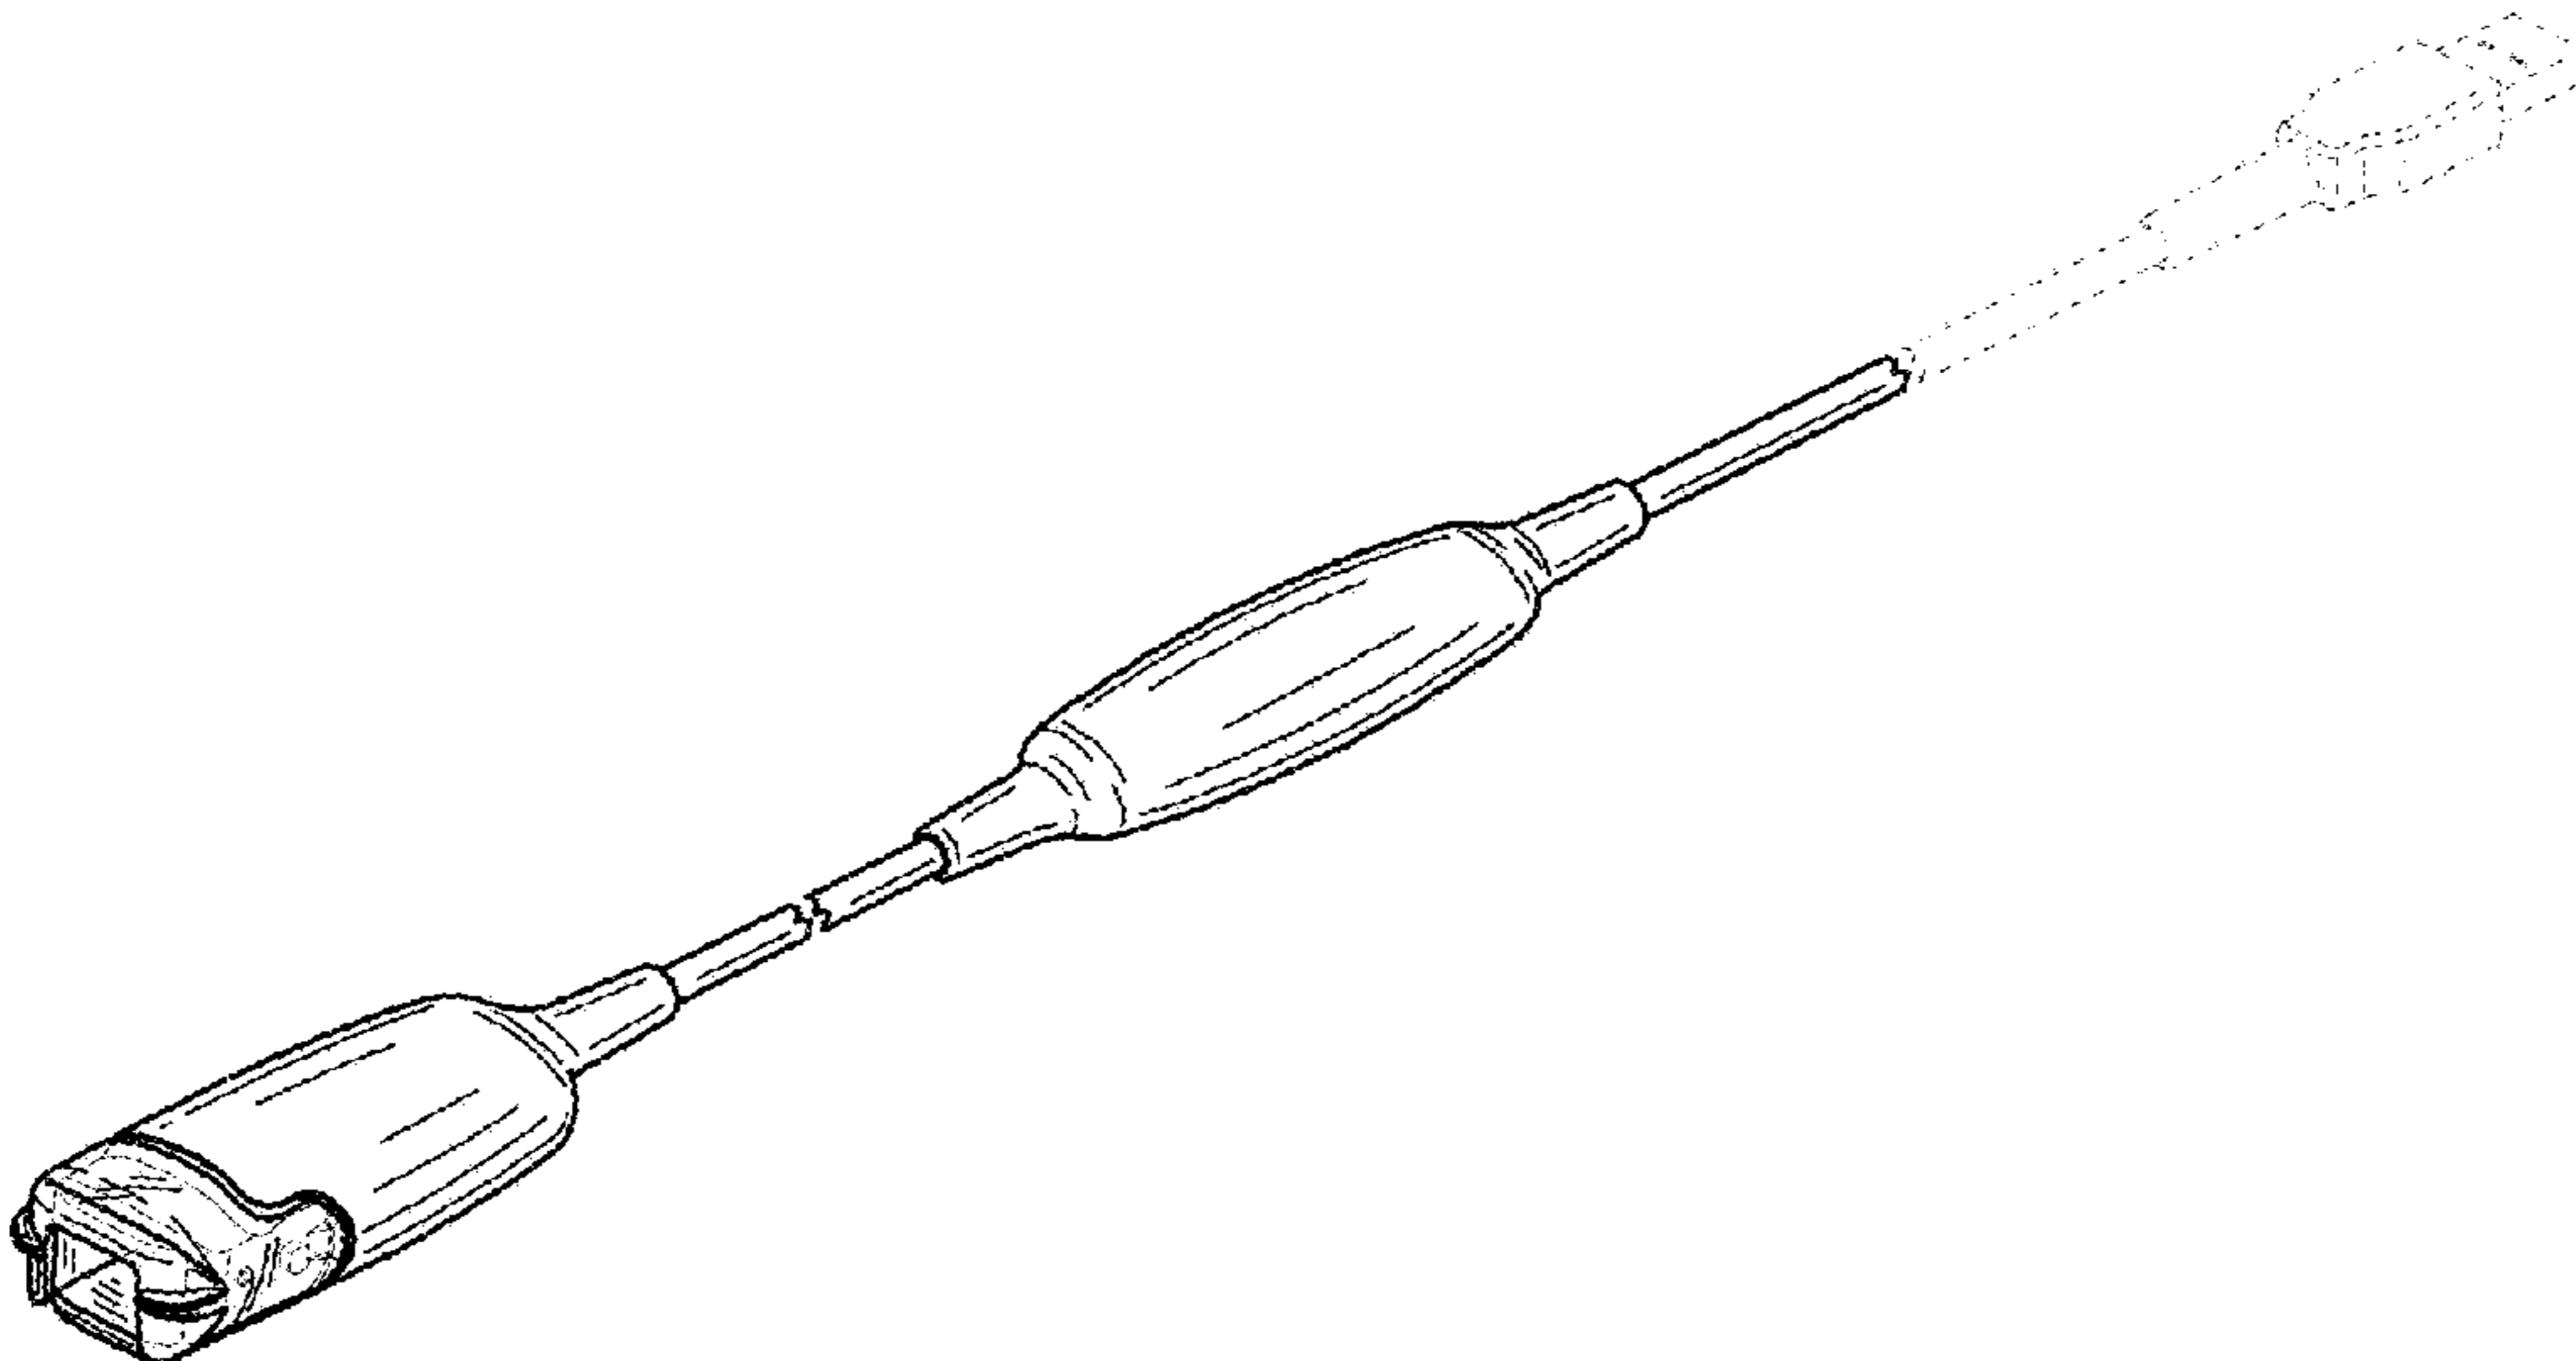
is a top view of the sensor cable and connector of FIG. 1;
